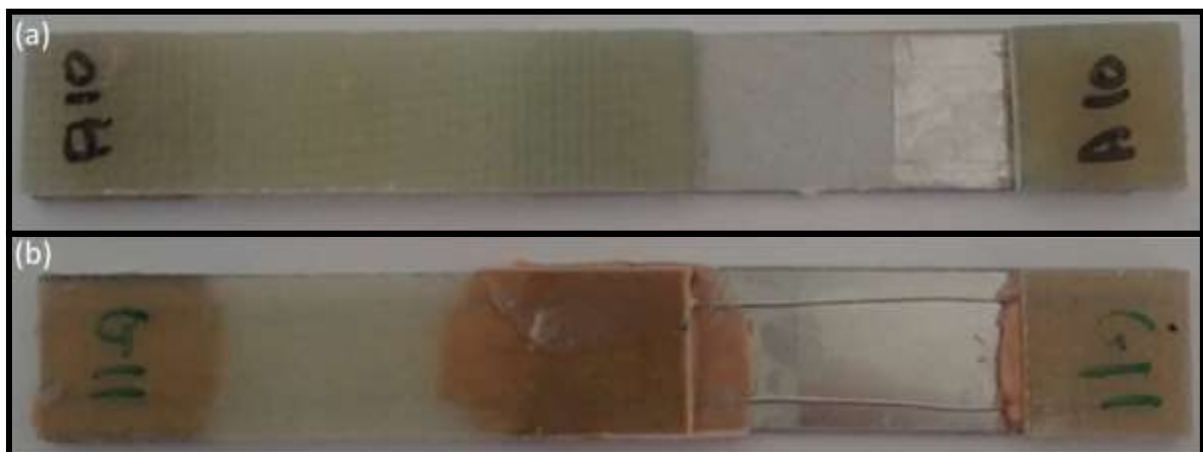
Typical fabricated specimens; (a) co-cured and (b) adhesively bonded single-lap joint.
